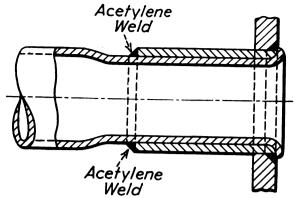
Flues and sleeves rolled tight in back tube sheet, sleeves welded complete and bead applied to flues
